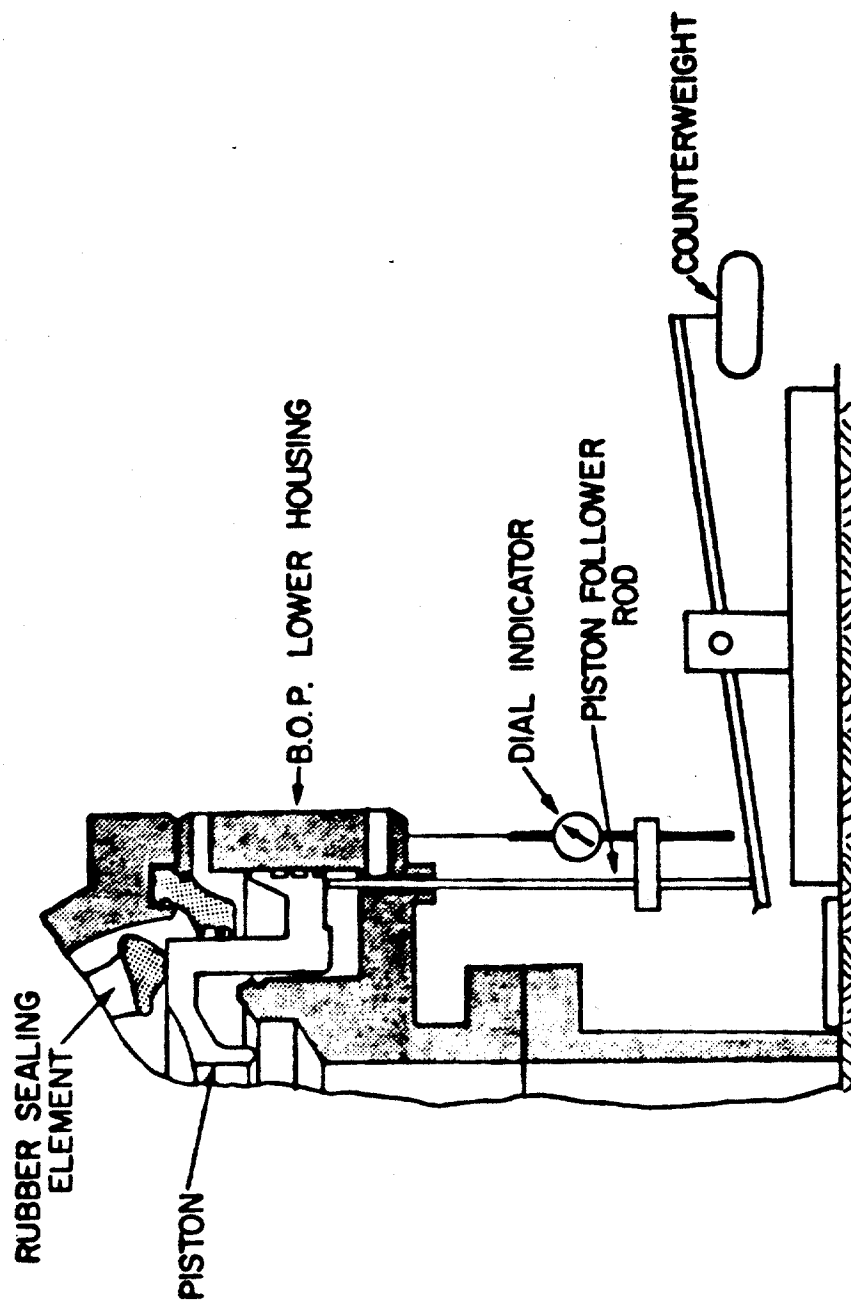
Piston Position Indicator Assembly Used with Spherical Blowout Preventer
